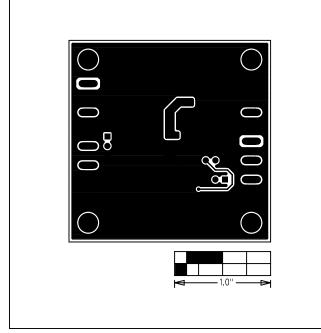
MAX17504 3.3V Output EV Kit PCB Layout— Solder Side
